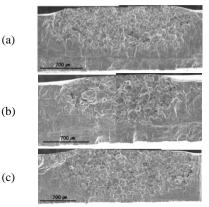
Fracture surface of (a) crack A, (b) crack B and (c) crack C.
